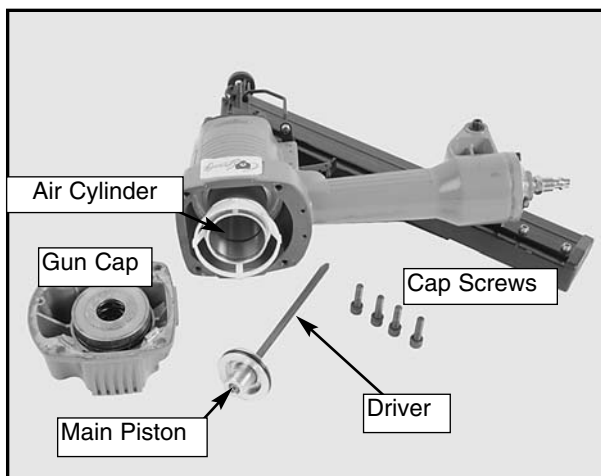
shows the gun partially disassembled to repair or replace the driver.
